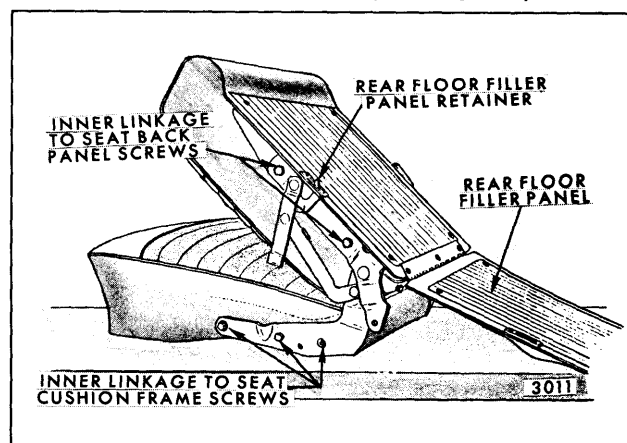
Folding Second Seat Cushion Assembly (Right or Left Side) - Vista Cruiser and Sport Wagon Styles
